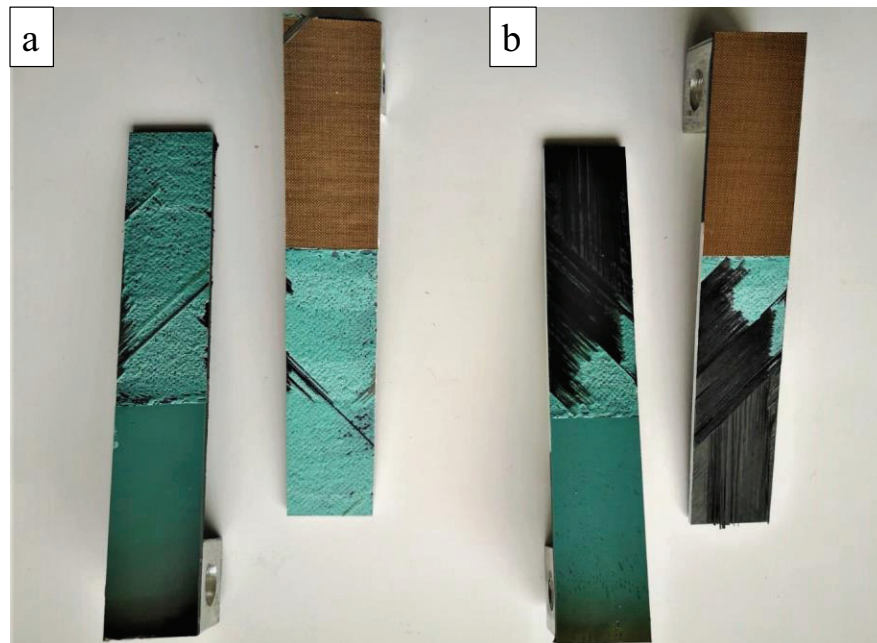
18. Photograph of the DCB surfaces of fractured a) reference sample and b) sample B (laser treated with 0.20 mm laser offset distance).
